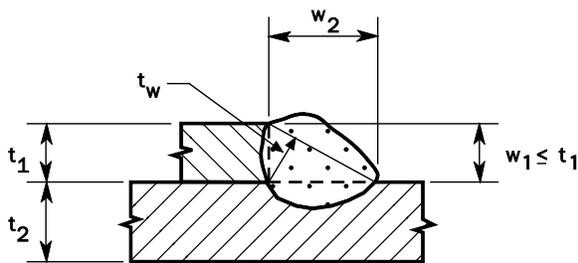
Fillet Welds - Lap Joint
